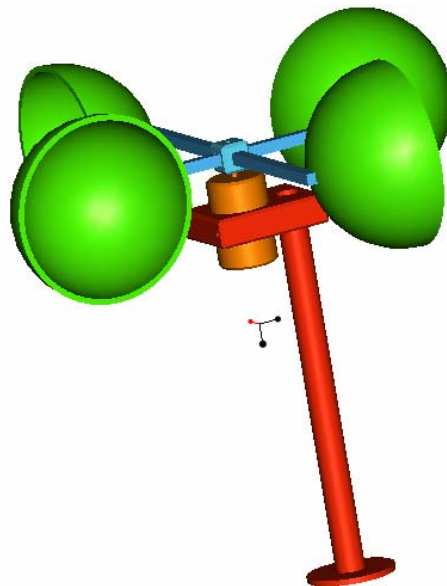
A Pro E generated concept for a vertical axis wind turbine using a DC motor and cup-blade assembly.
